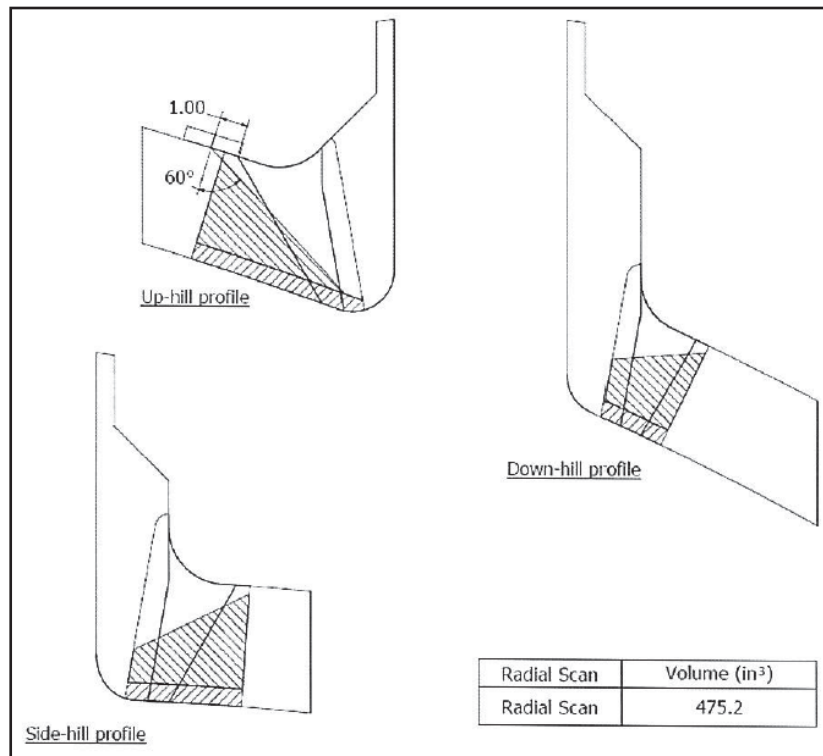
Weld N6A-NV, Achievable Radial Coverage
